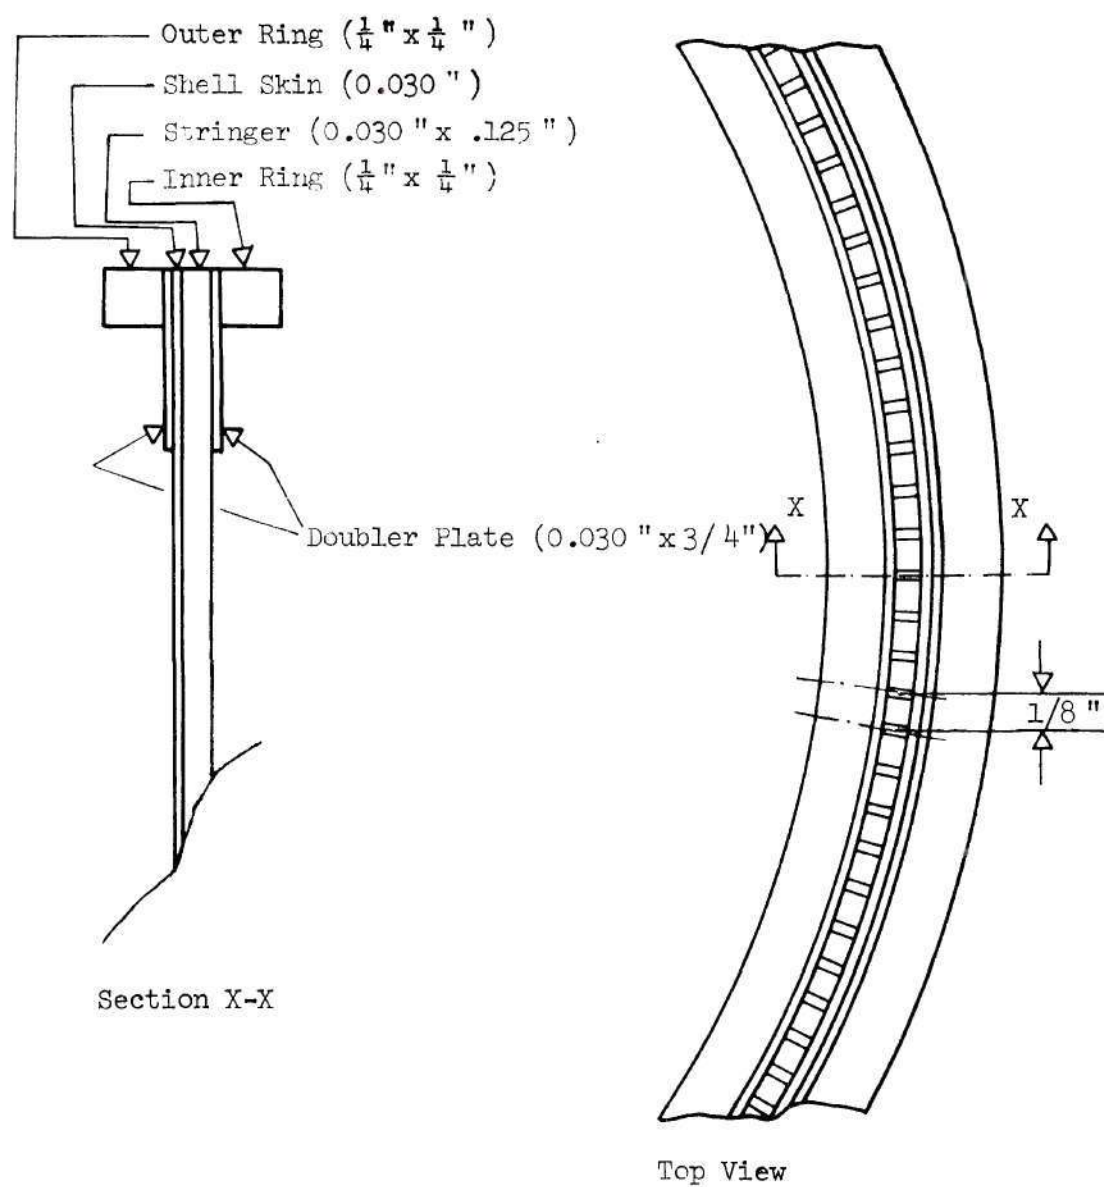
Typical Plexiglas Shell Construction (Specimen 2).
